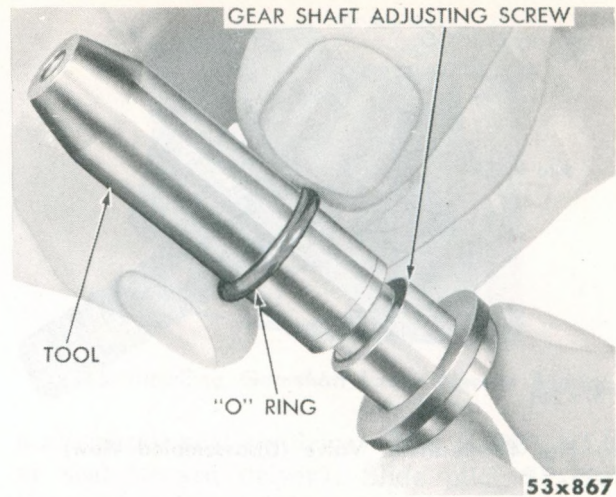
Installing Gearshaft Adjusting Screw "O" Seal Ring
